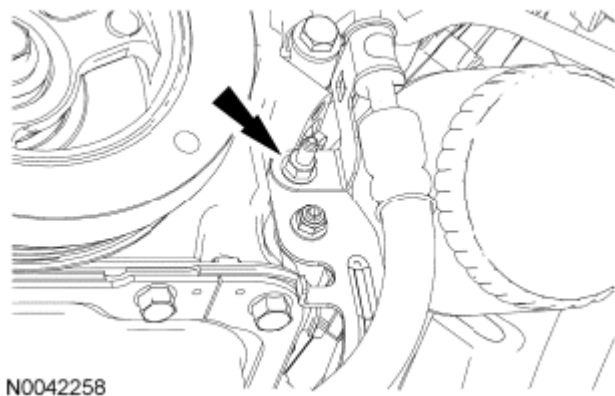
Identifying Power Steering Pressure Hose Bracket And Nut
